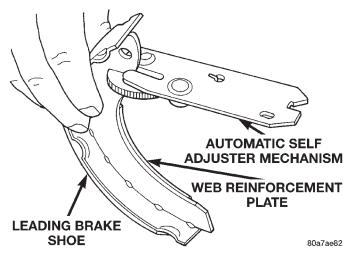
Adjuster Mechanism Correctly Installed On Correct Leading Brake Shoe
